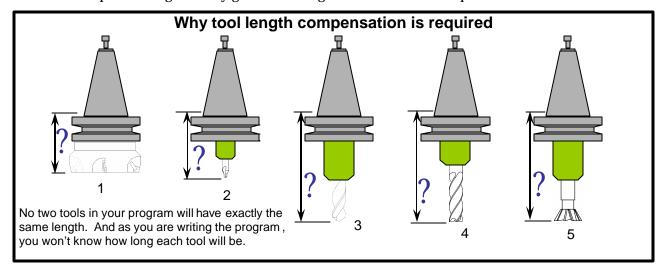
Five cutting tools that might be used in by a CNC machining center program
